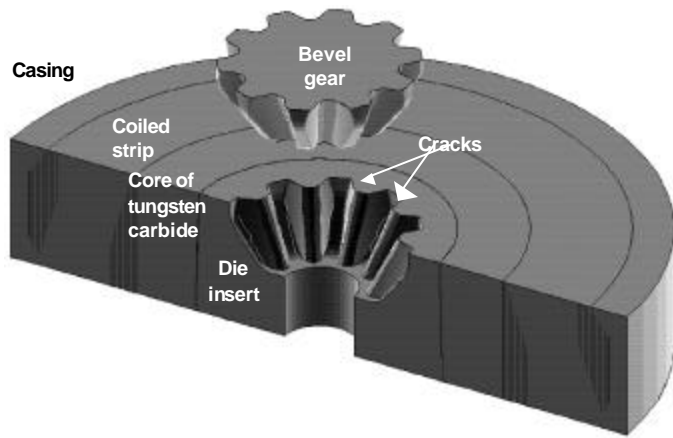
Bevel gear and section of STRECON<sup>®</sup> E<sup>+</sup> prestressed container with die insert for production of bevel gears
